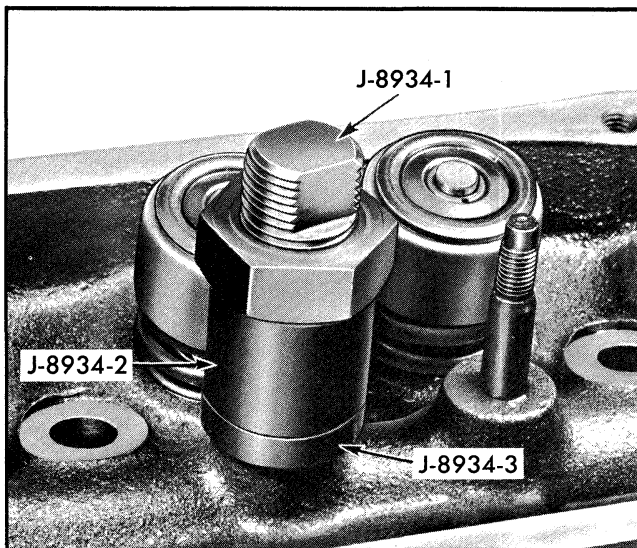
Tool J-8934 Positioned to Remove Rocker Arm Stud
